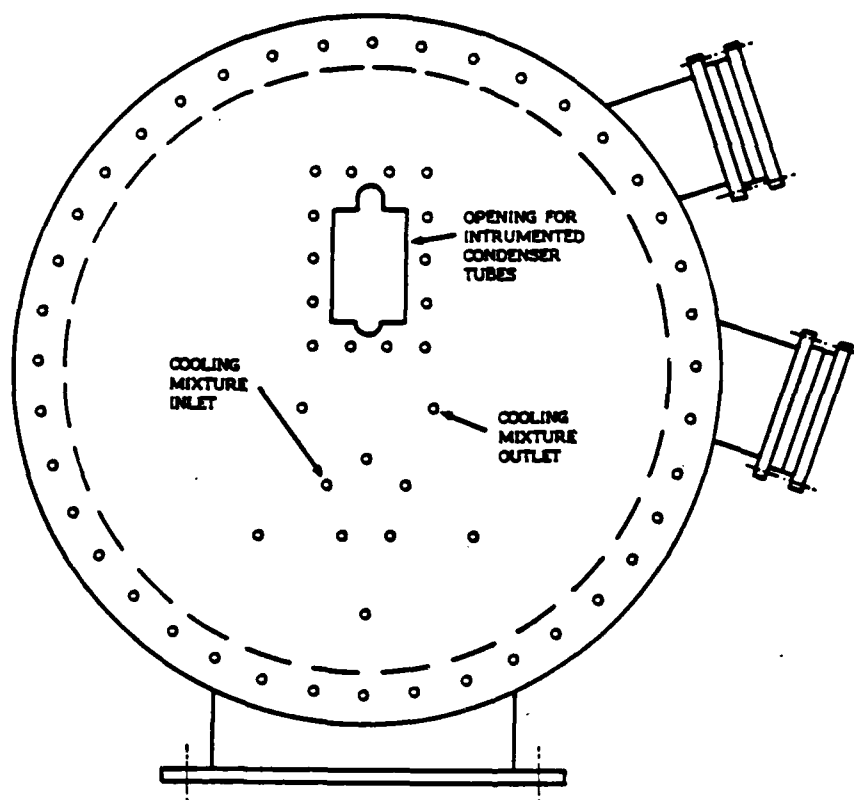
End View of Multi-Tube Apparatus Condenser.
